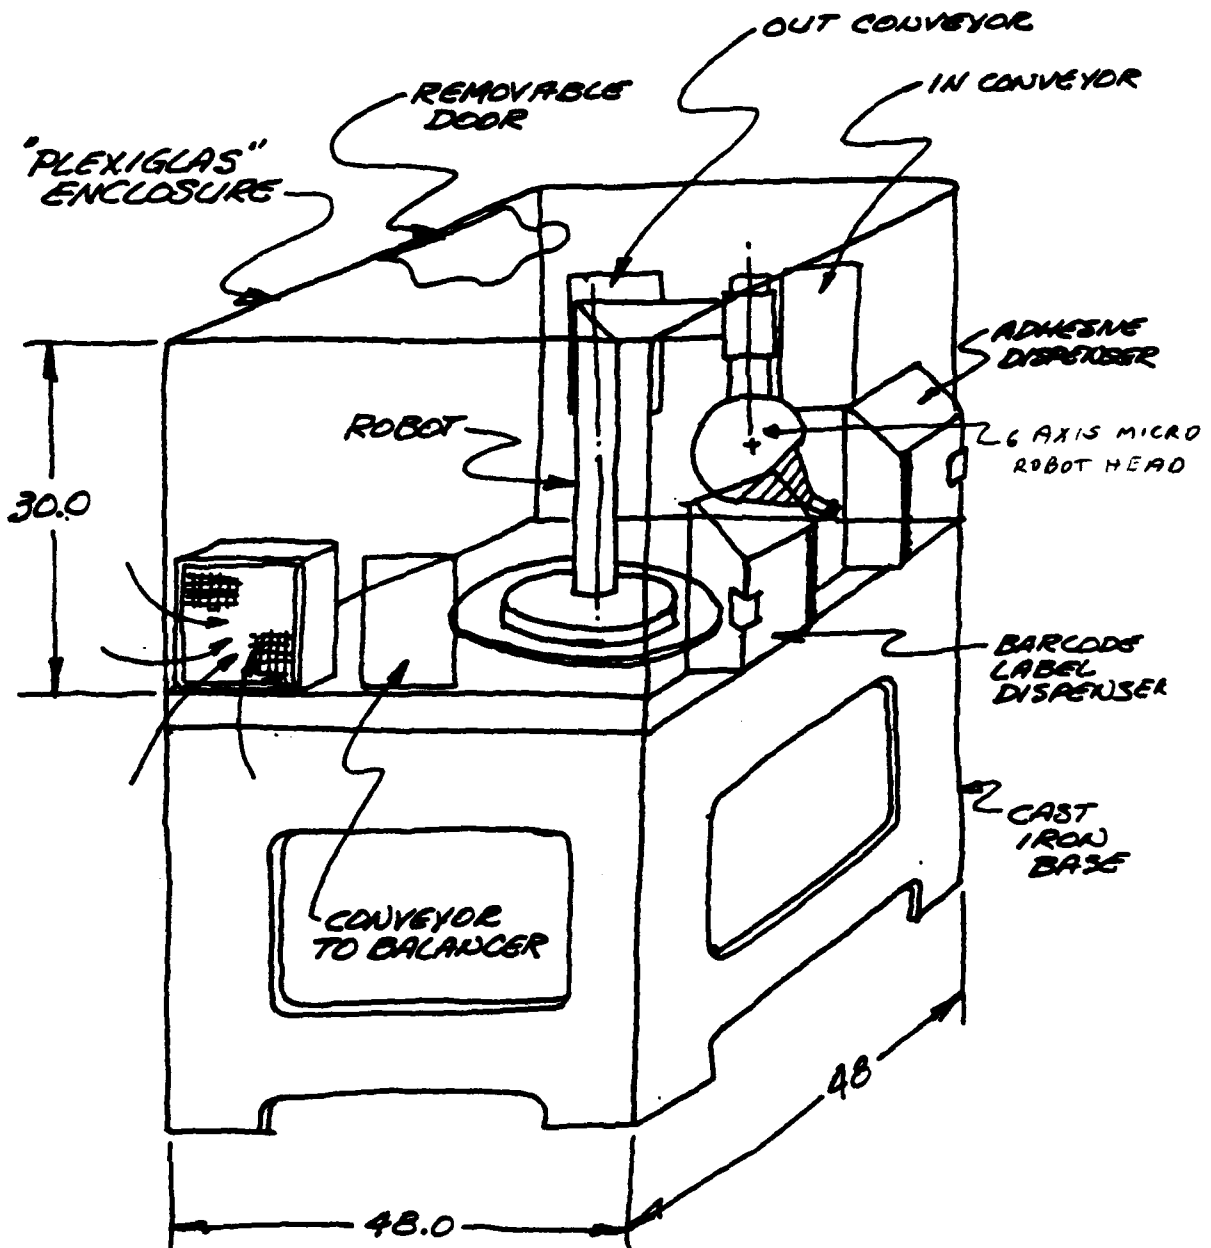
Mounting Stand and Enclosure for Spinmotor (Robot Assembly Cell GG1111/GG4400/GNAT)
